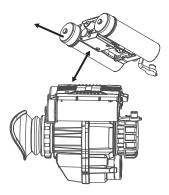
, DISASSEMBLING HANDHELD F14
